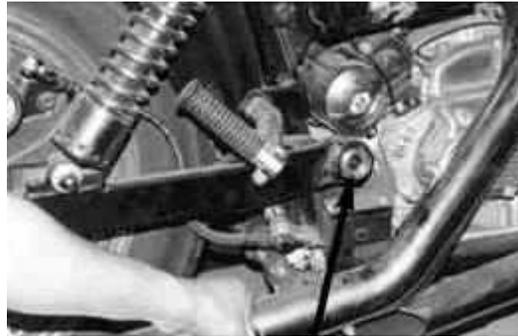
Remove exhaust to allow access to the swing arm pivot bolt
